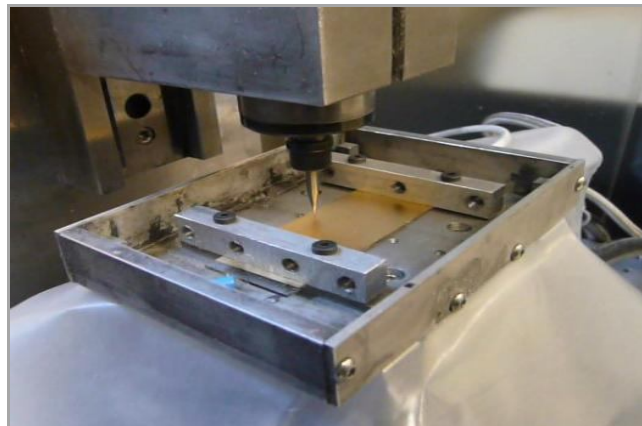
Micro-machining cutting surface (courtesy of Dr. Shreyes Melkote)
